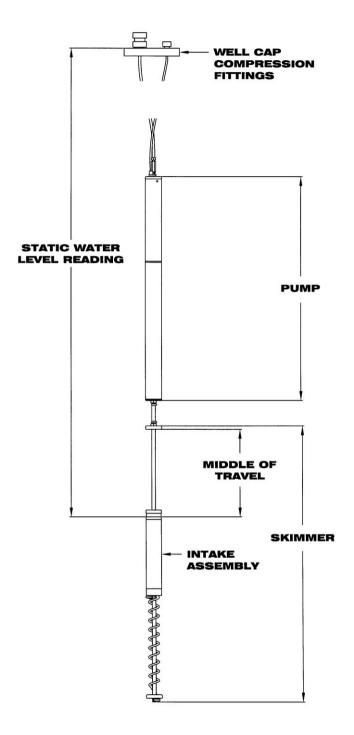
Pump and Skimmer Assembly with Well Cap
